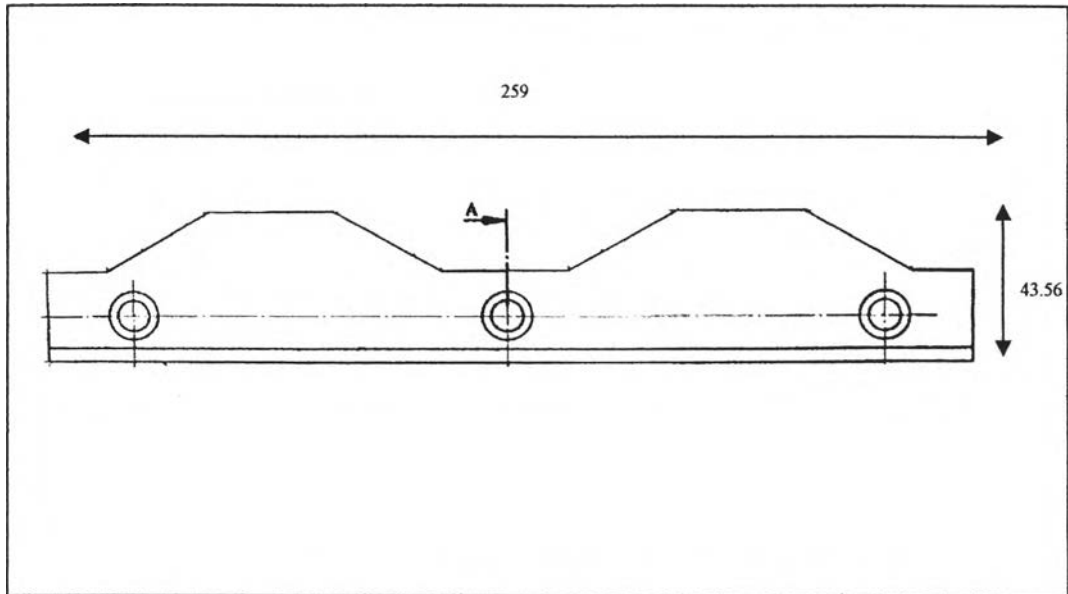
Drawing of Lower Blade No.L2 211x109
